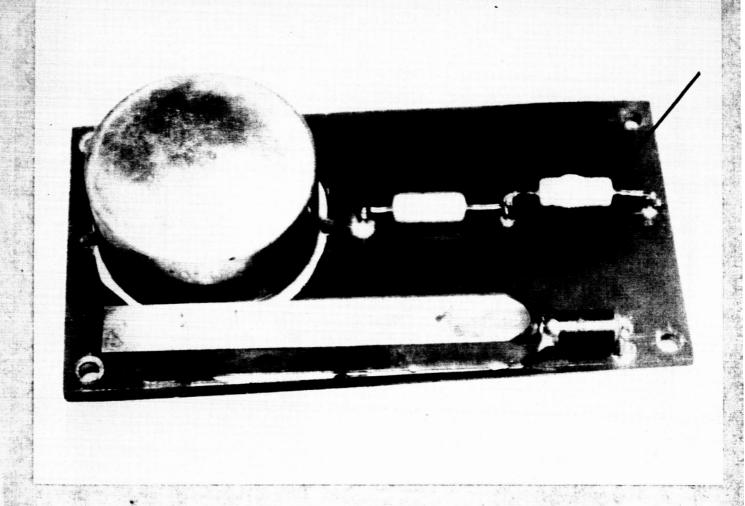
DUMMY RECORDER CAPSULE ASSEMBLY COMPONENT BOARD
